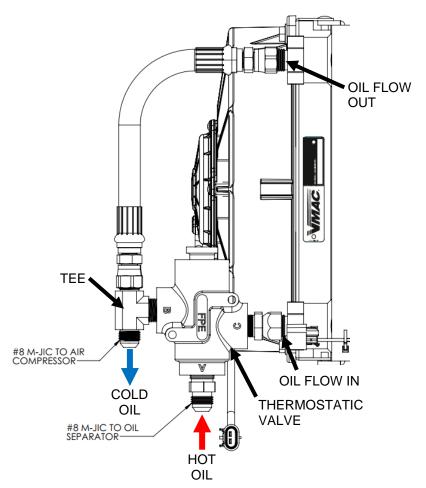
Thermostatic Valve on Air to Oil Cooler
